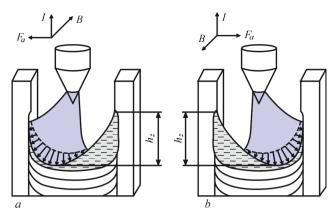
Scheme of melting the side walls of a narrow gap and location of the welding arc: a, b—extreme positions; h_z —height of the weld metal layer being deposited
